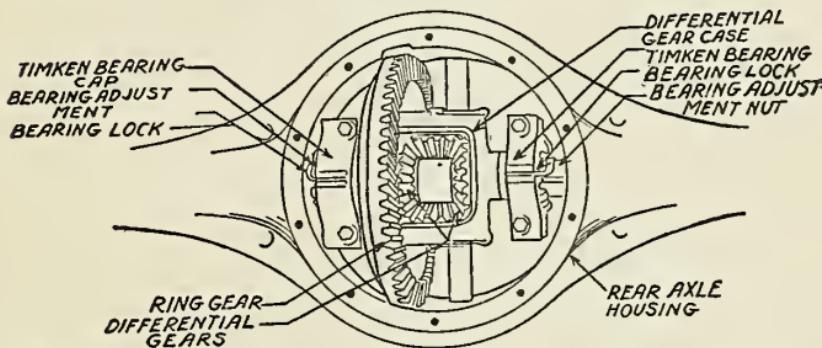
B. The differential gears in their housing on the rear axle of a Chalmers Car.
